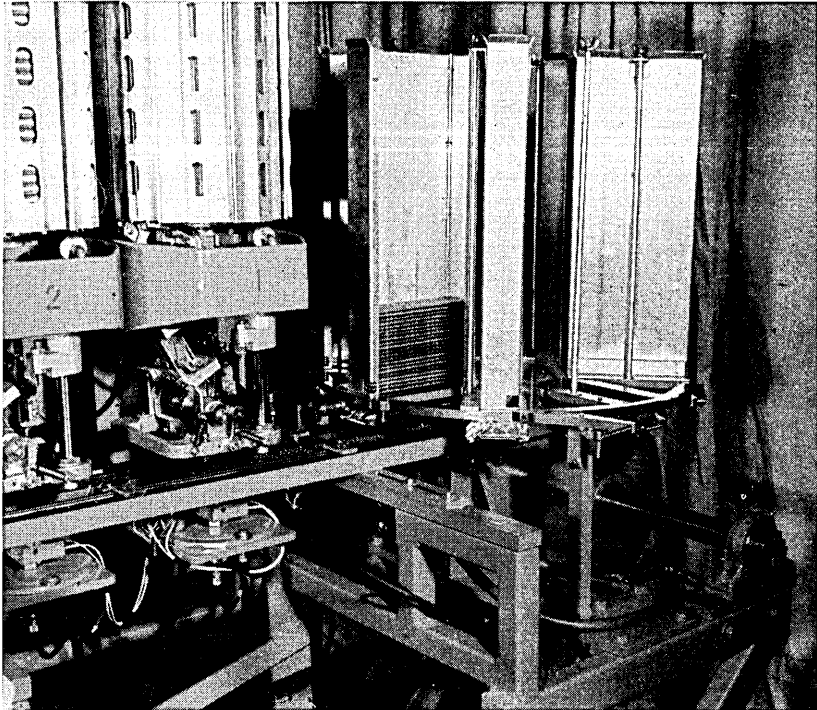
Circuit baseplate storage and feeder—component magazine turret mounted on top of attaching head automatically indexes to next full magazine when empty
